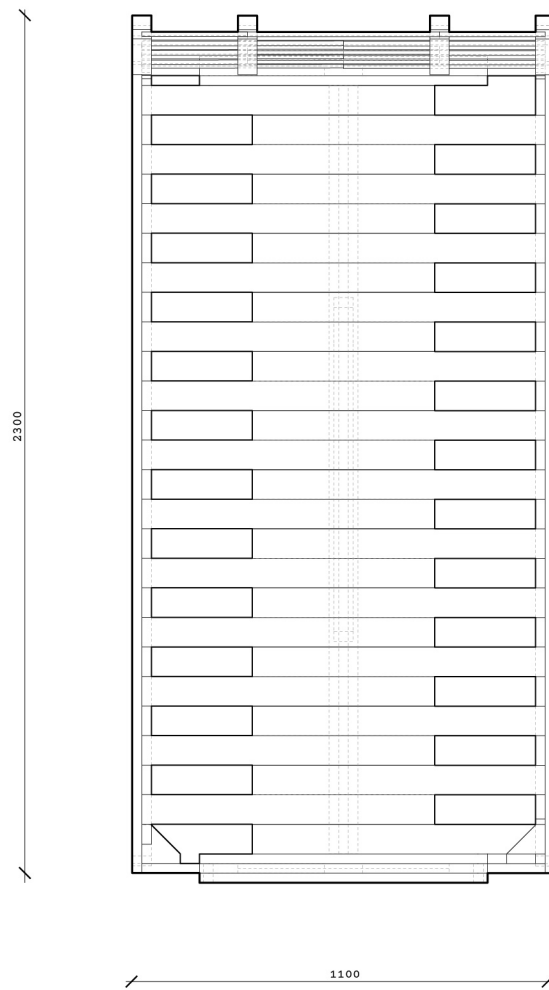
Bed Plan - Twin Size, Drawing by Author
